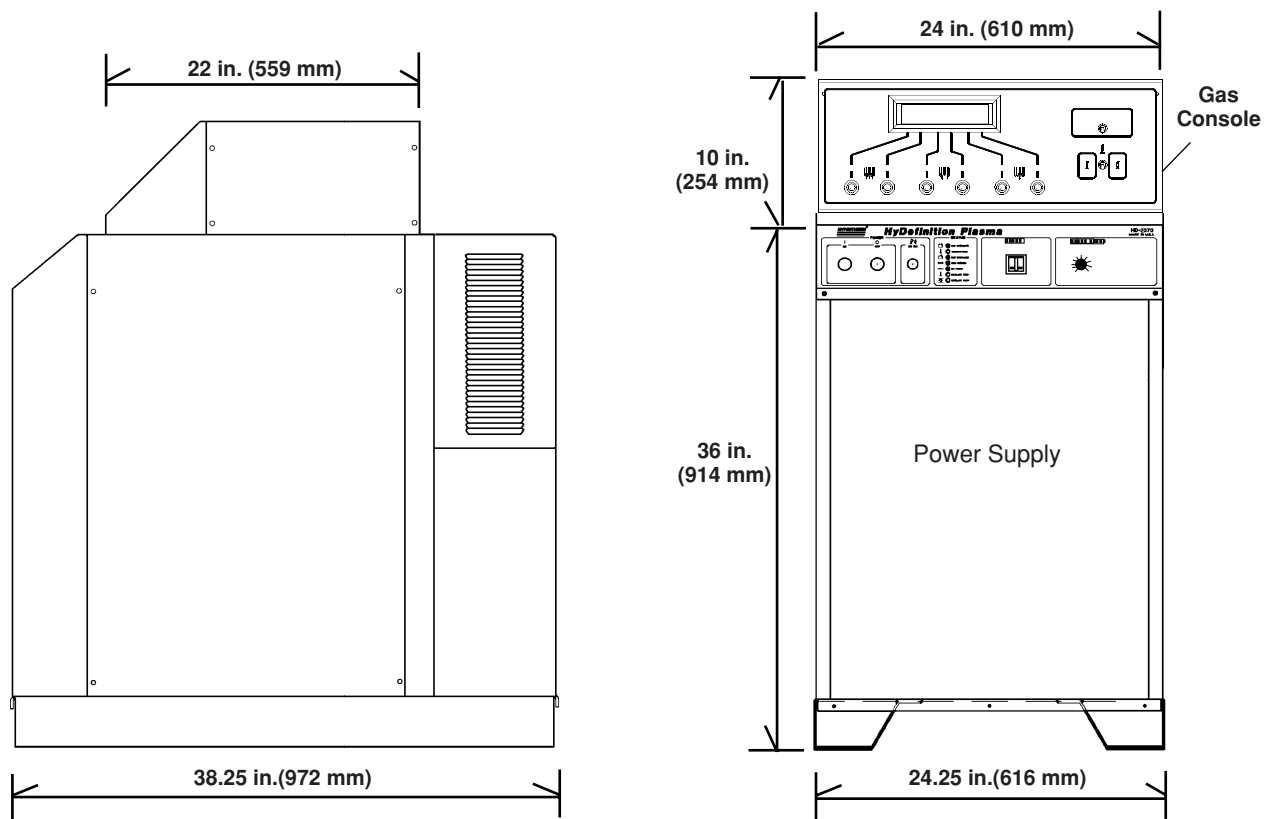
HD3070 Power Supply with Automatic Gas Console – Placement Dimensions
